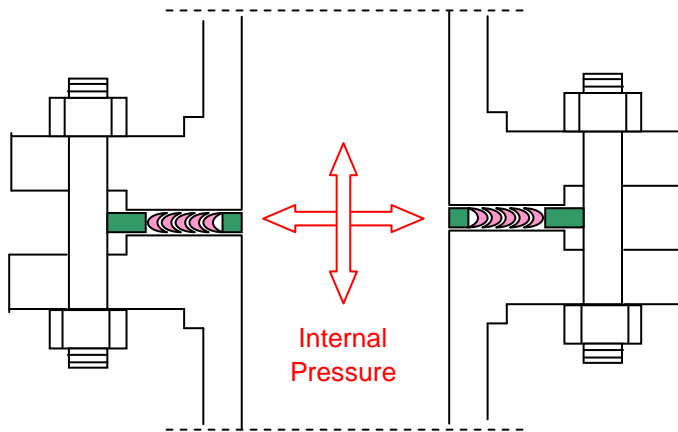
Cross section of a spiral wound gasket with inner and outer rings installed between raised face flanges
